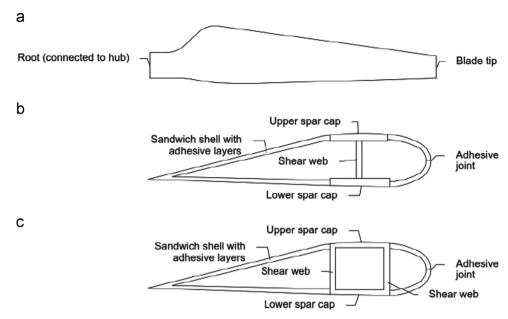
(a) Plan view of blade, (b) cross section view of blade with shear web supported spar cap, and (c) cross section view of blade with box spar.
